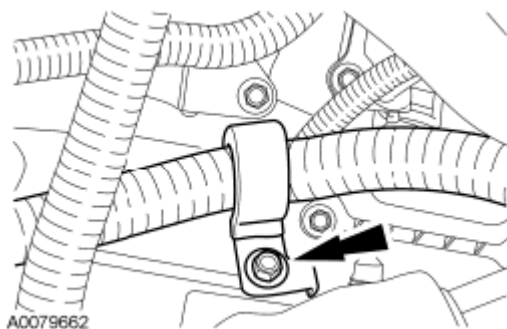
Locating Starter Wiring Harness Support Bracket And Bolt
